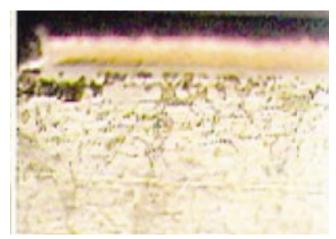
Cross-Section of a Crack Initiation at the Ball/Pad Interface
